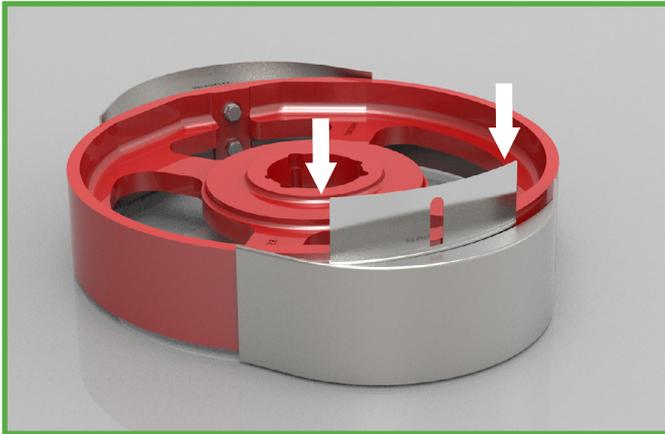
Mounting Rotor Shims on the Rotor (Step 1)
